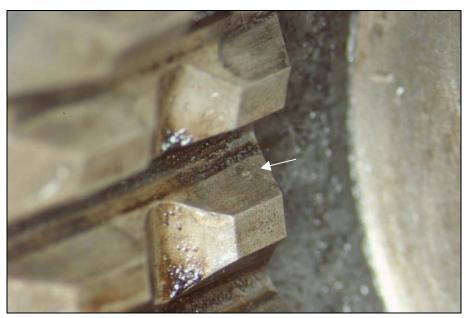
Internal spline tooth pitting and re-melting (compressor rear hub coupling end)
